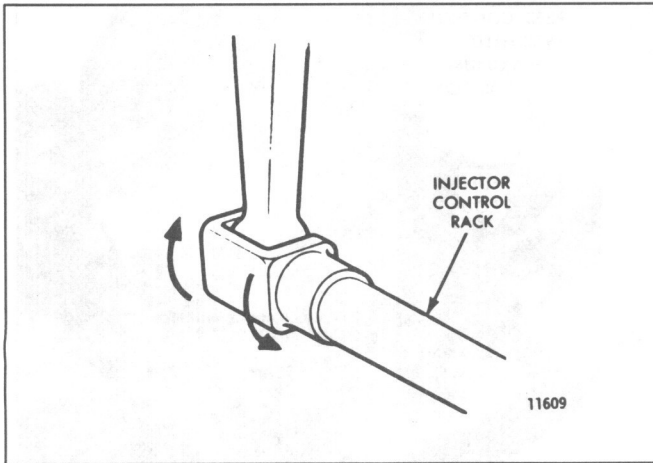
Checking Rotating Movement of Injector Control Rack
